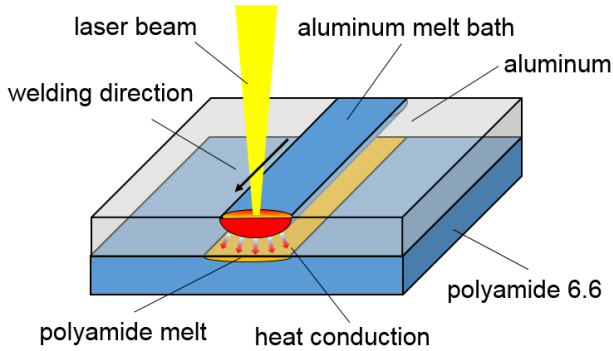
Heat conduction welding of PA 6.6 to aluminium
